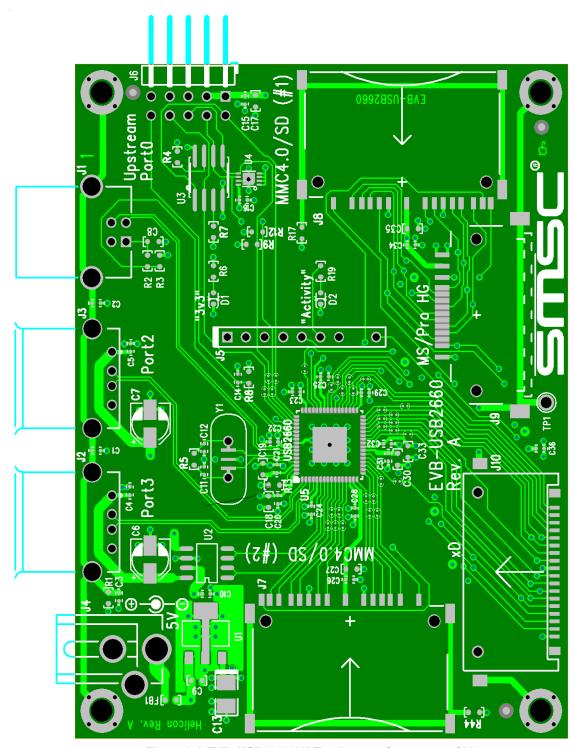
EVB_USB2660/60i Top Layer - Component Side
